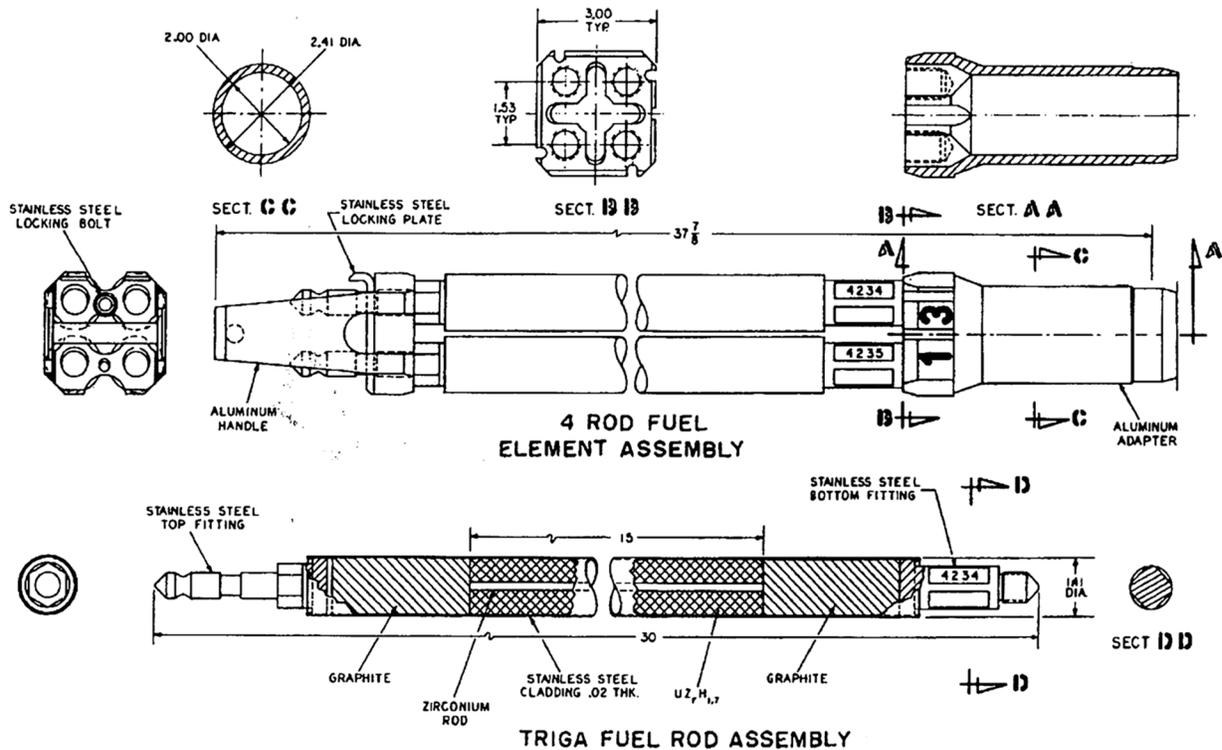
TRIGA fuel element (TRIGA fuel rod assembly) and bundle element assembly, SAR Figure 4.1 (dimensions in inches)
